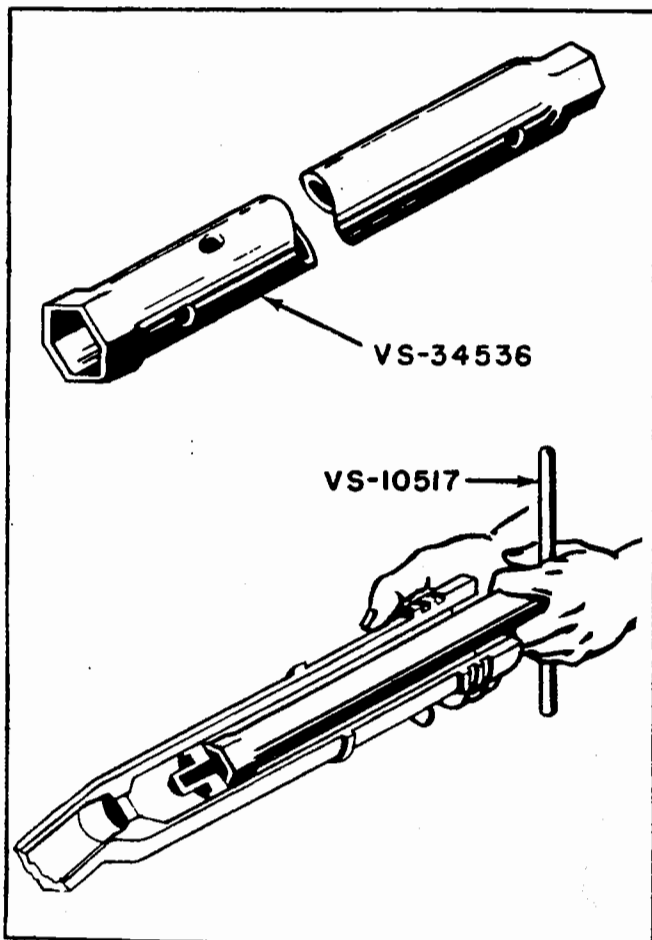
Wrench - Used for Removal of Metering Pin from Main L.G. Shock Strut Piston Assembly.
